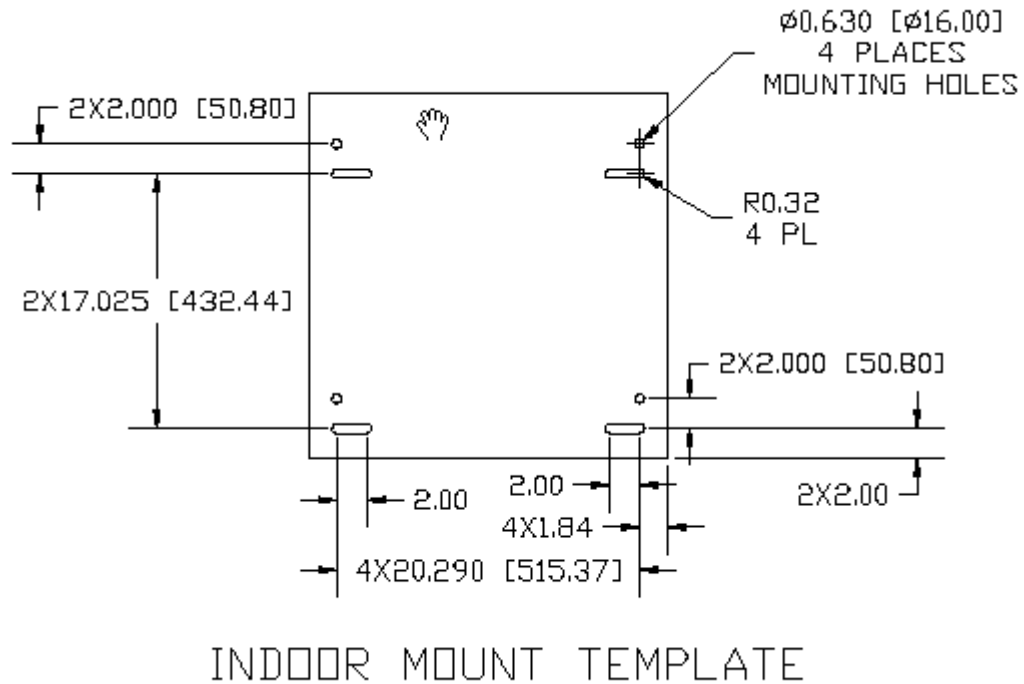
Clearance Holes in Cabinet Base — Schematic View
